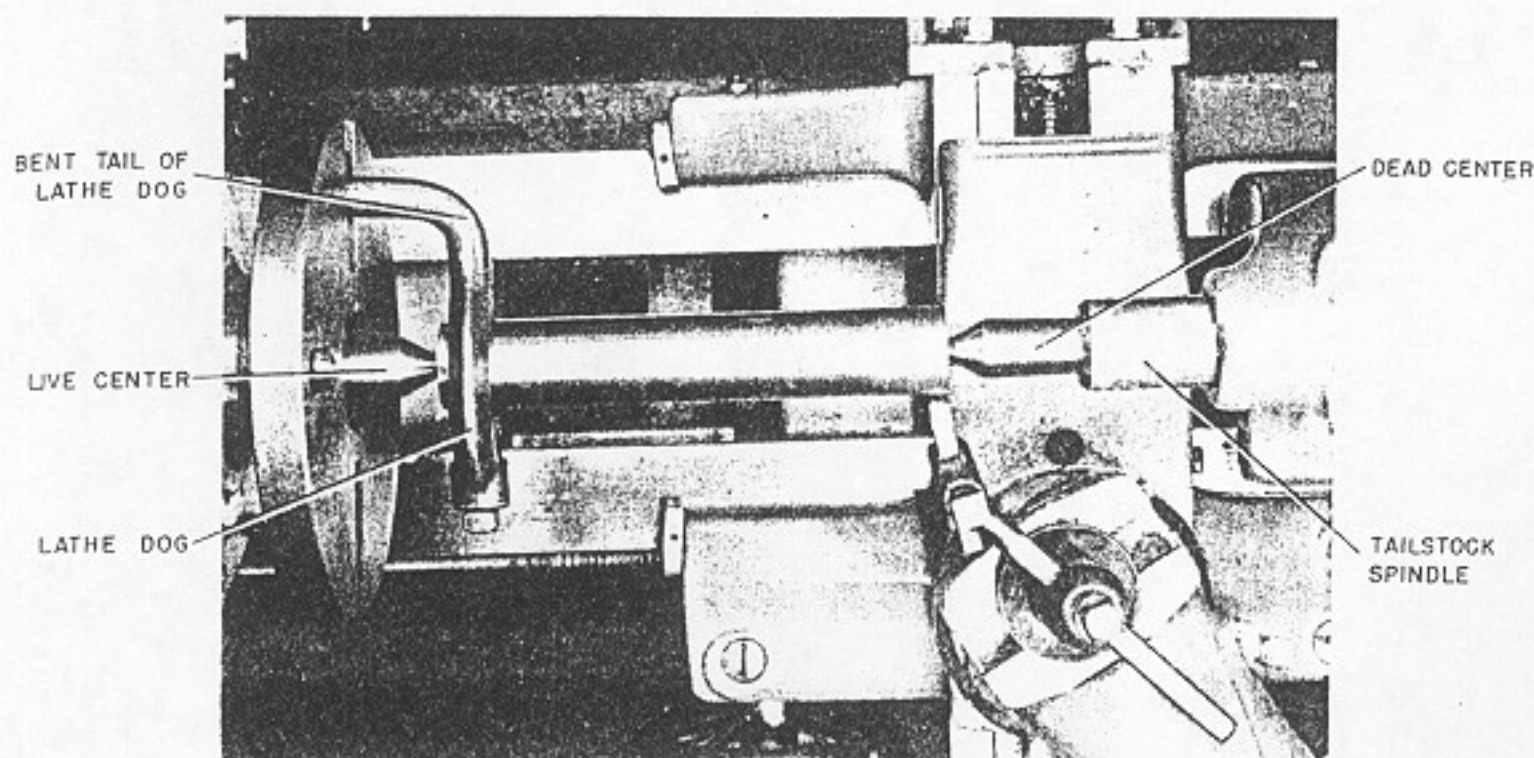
When the dead center is adjusted too tightly, it will often cause the point of the dead center to wear or be twisted off.
